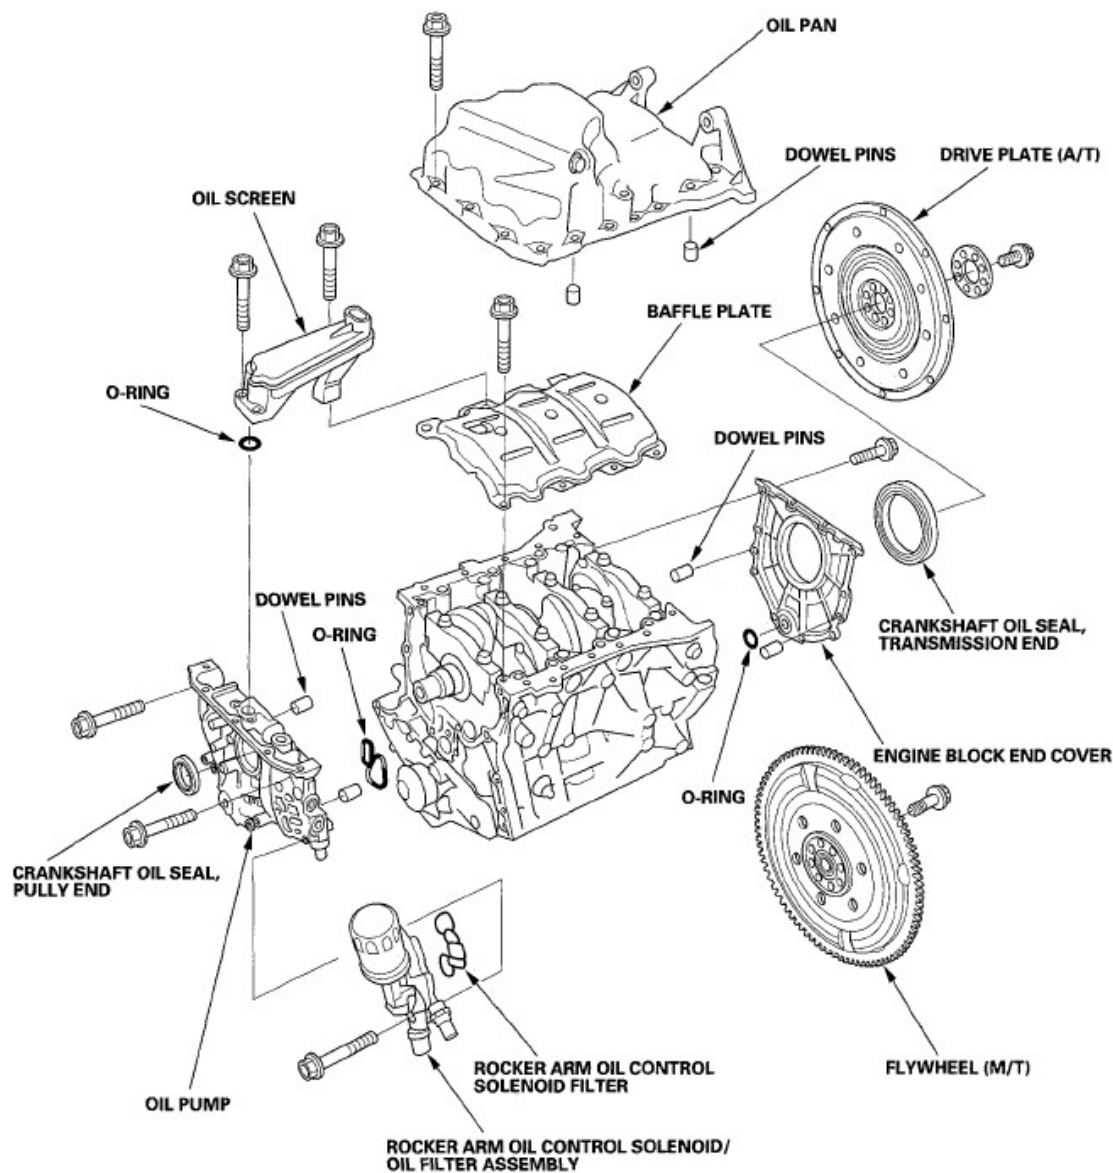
Identifying Engine Block Component Location (1 Of 3)
